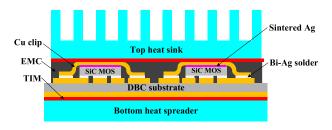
Double-side cooling packaging for SiC high-power inverter module.
